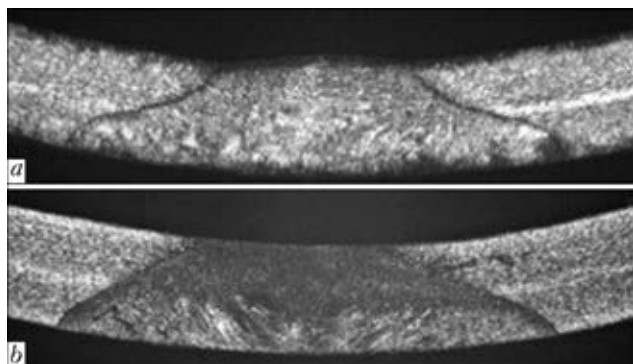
Macrostructure ($\times 12$) of welded joints of $\text{Ø}20 \times 0.8$ mm tubes from TR 316L steel: *a* – undeformed weld; *b* – deformed weld
